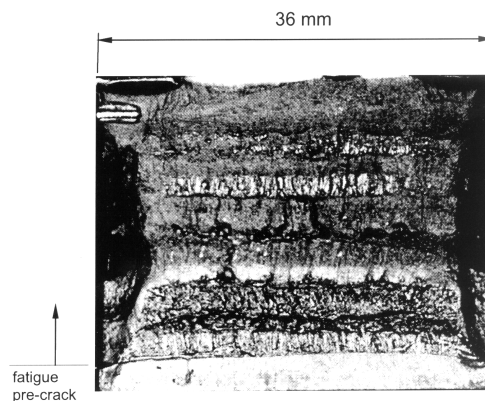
Fracture surface of specimen BxB-as-3
